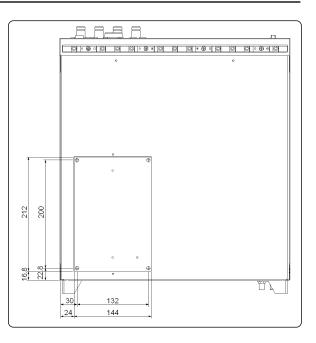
Dimensions (top view, in millimeters, nominal)
